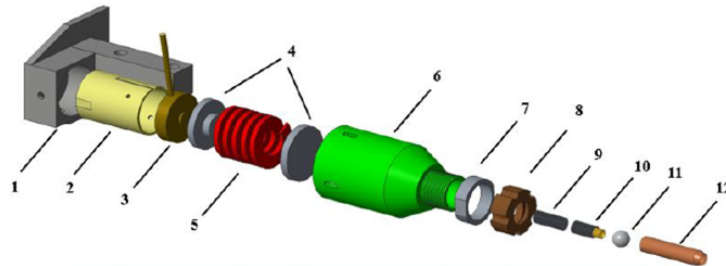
Rotating ball burnishing tool (Hiegemann and Tekkaya, 2018).
